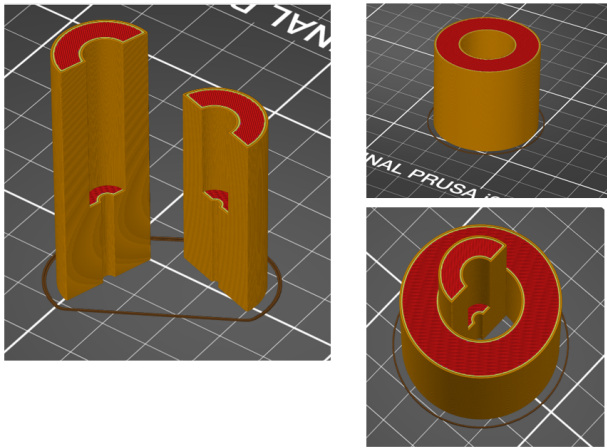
CAD design of photocathode coupler with fibre inserts. Designed in OpenSCAD and presented in Prusa Slicer package which is used to 3D print the piece.
